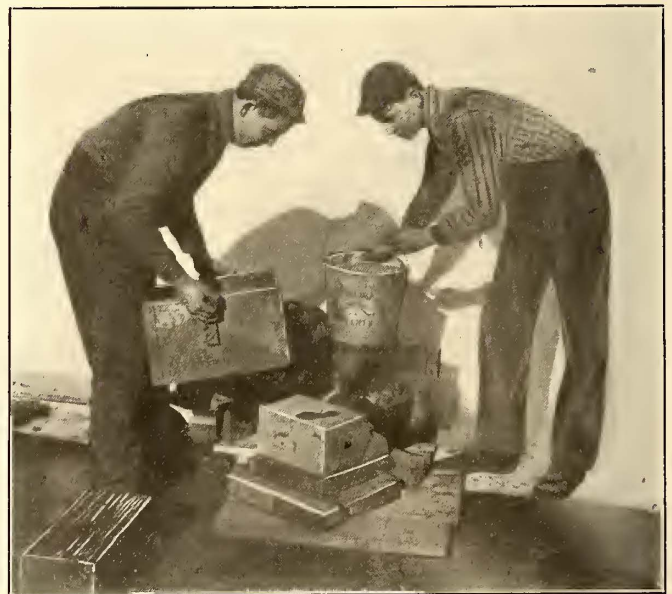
PLACING THE COVER AROUND THE MOLD
